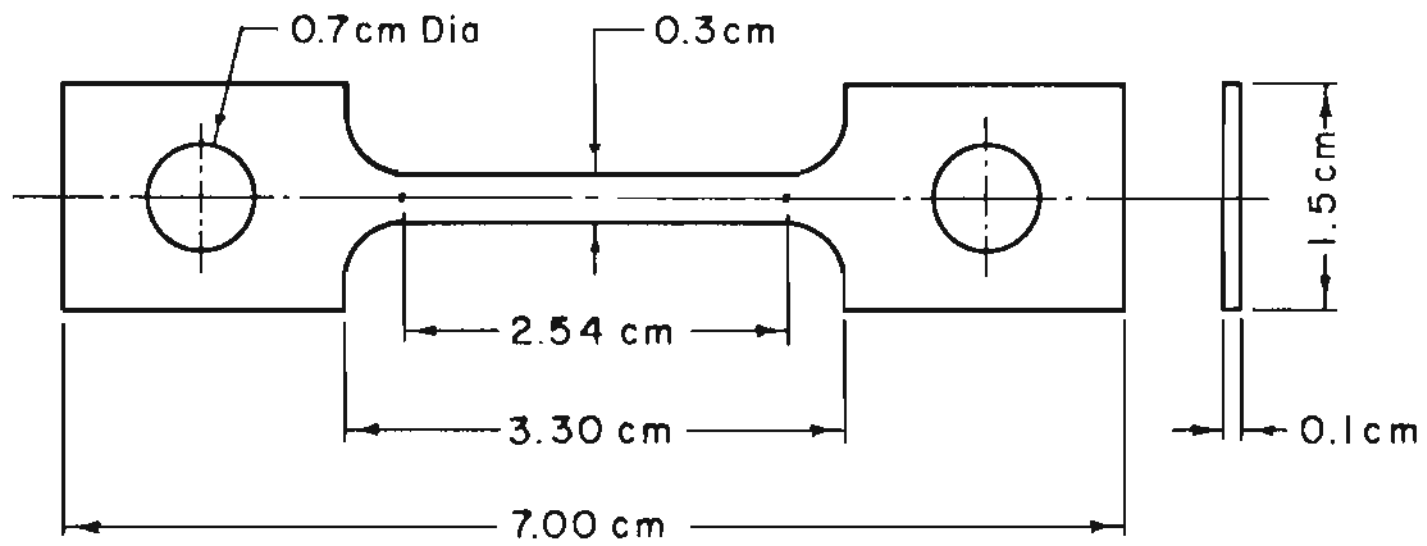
GEOMETRY OF THIN TENSILE SPECIMEN.
